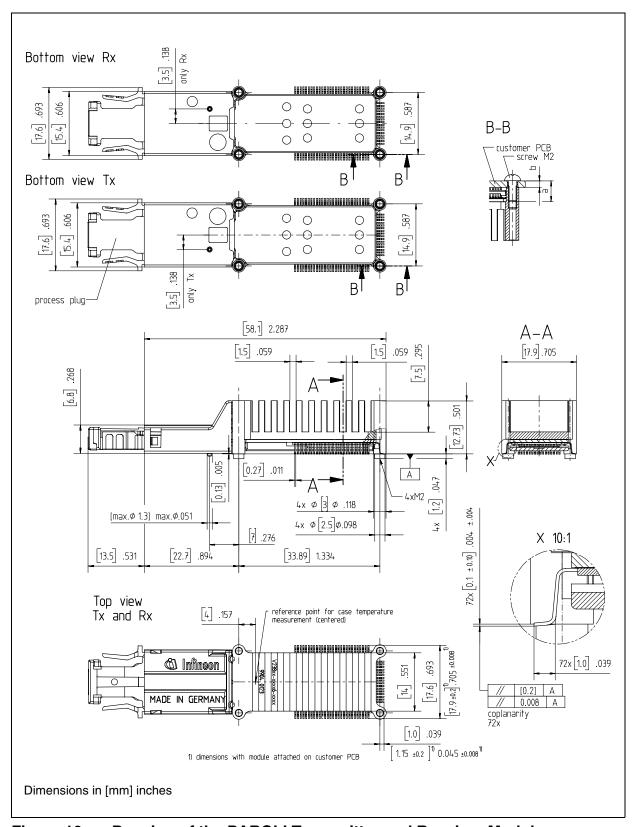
Drawing of the PAROLI Transmitter and Receiver Module
